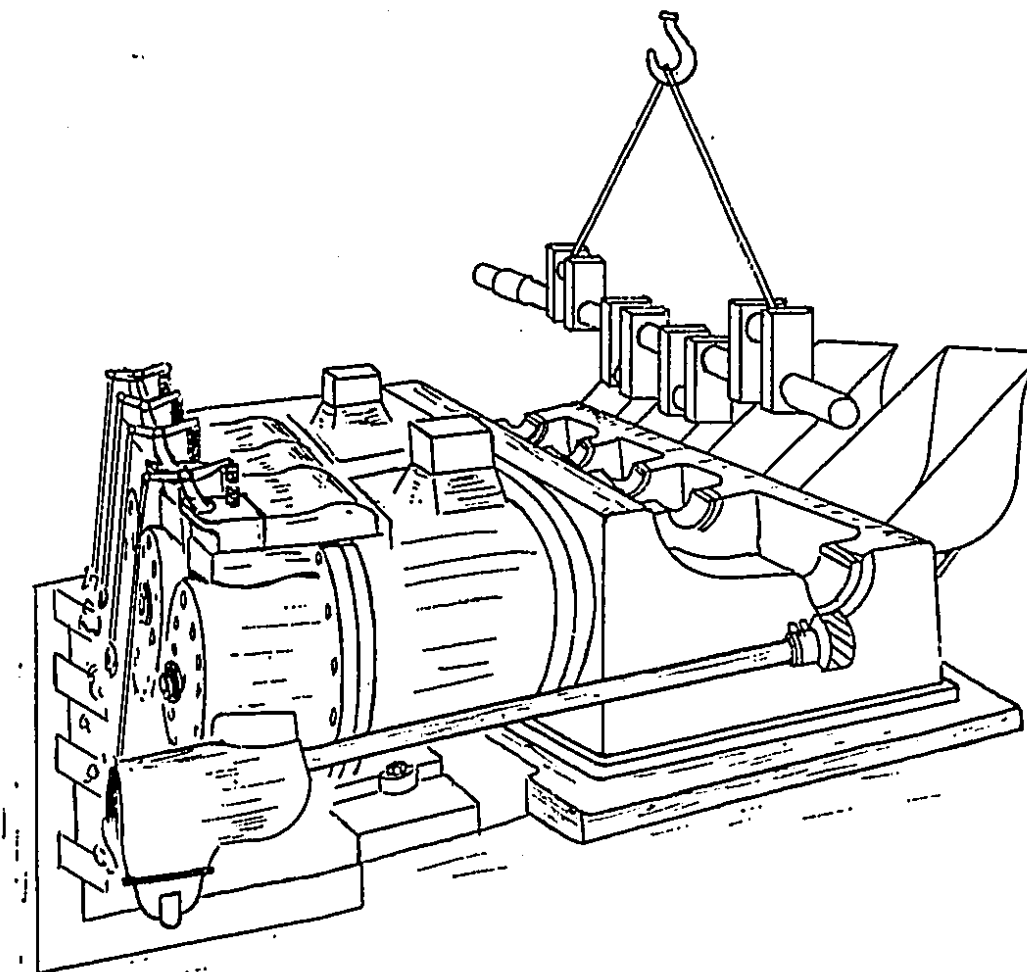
A horizontal crankshaft can be inspected in place after disconnecting the big ends and removing caps and top halves of bearings, as it is all in the open. Or it can then be removed from the engine after taking off the flywheel.
